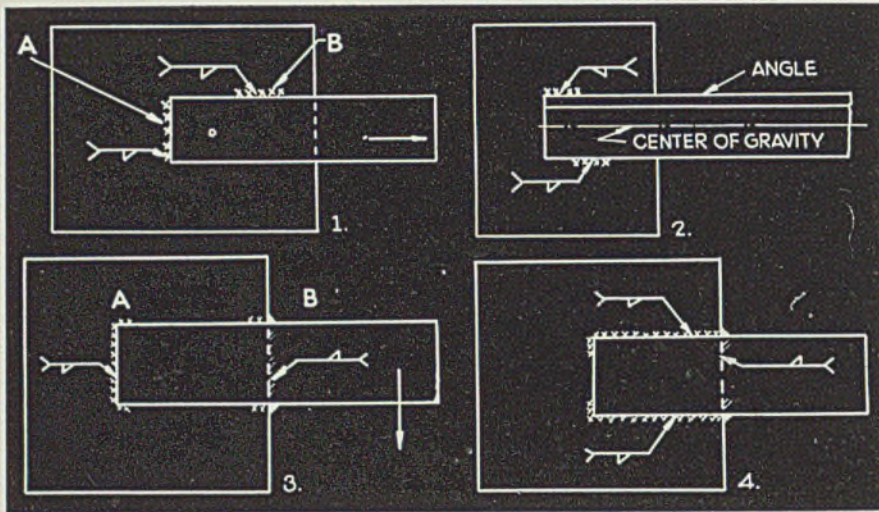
Transverse welds are stronger than welds parallel to lines of stress. Fig. 2—Example of correct lengths of welds for equal load distribution. Fig. 3—Example of proper placement of welds to resist turning effect of one member at the joint. Fig. 4—Welds hooked around the corners to obtain resistance to tearing action when subjected to eccentric loads
